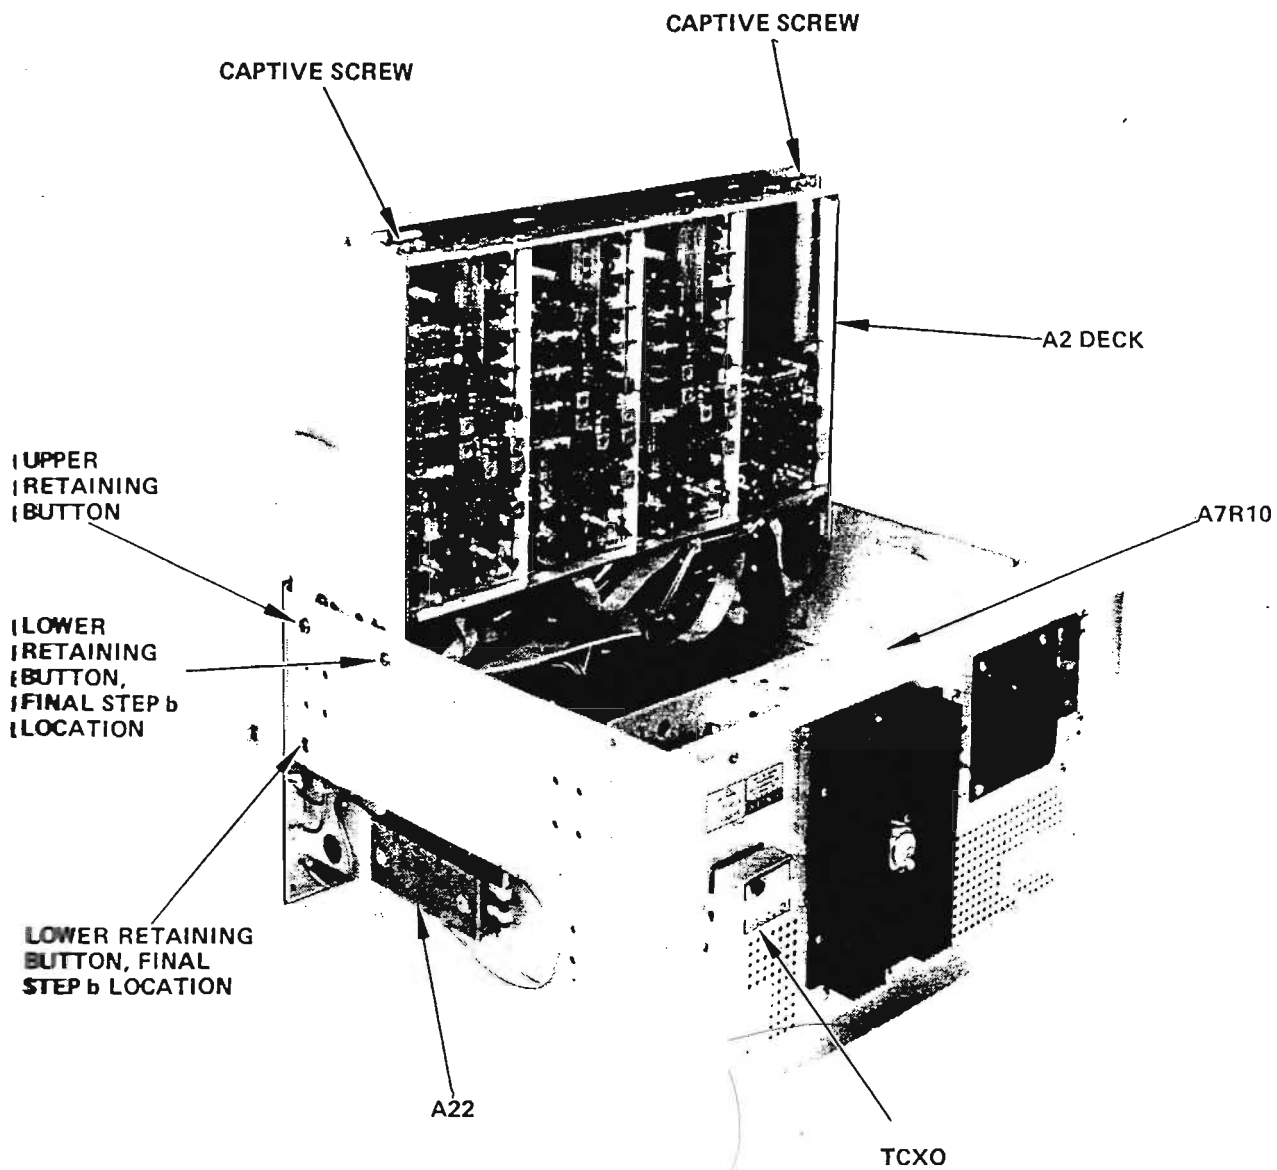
Synthesizer Foldout, Step b, Rear View
